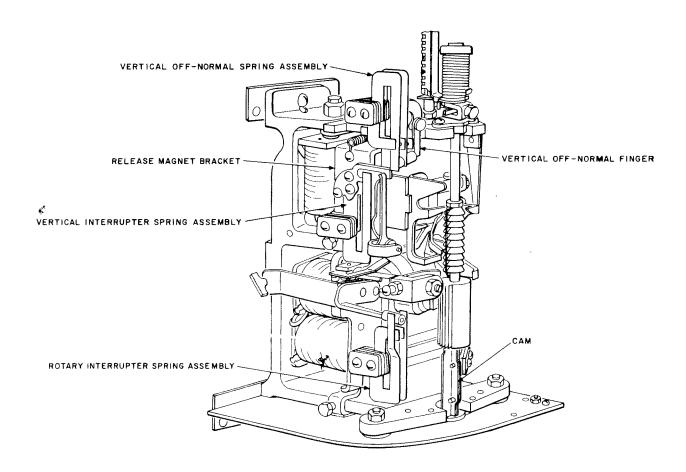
Parts of 197-Type Switch as Viewed From the Left Side
